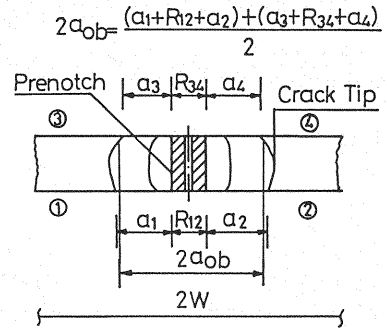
Schematic drawing of profile of crack front and definition of crack length
